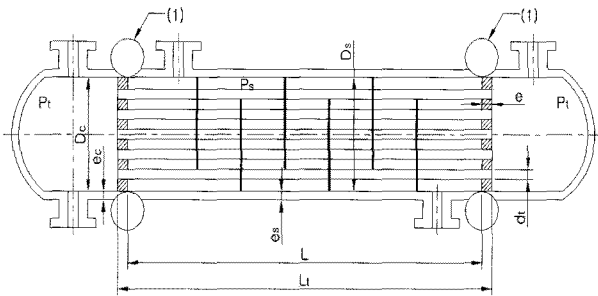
Shell & tube oil cooler of a fixed tube sheet
